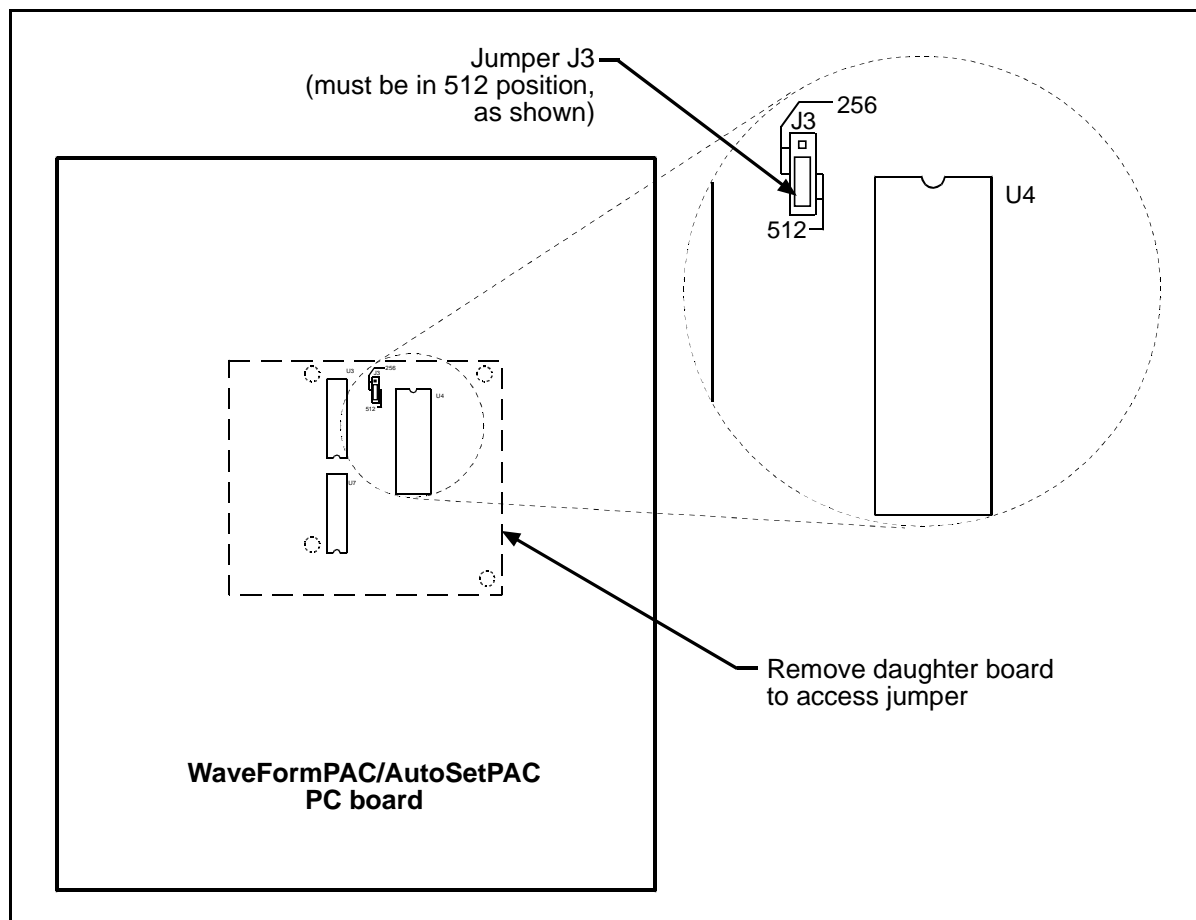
Location of AutoSetPAC Jumper, Older Version Board
